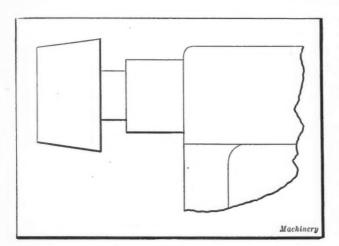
Tailstock Plug for Use in lining up Pot Casting in Lathe
